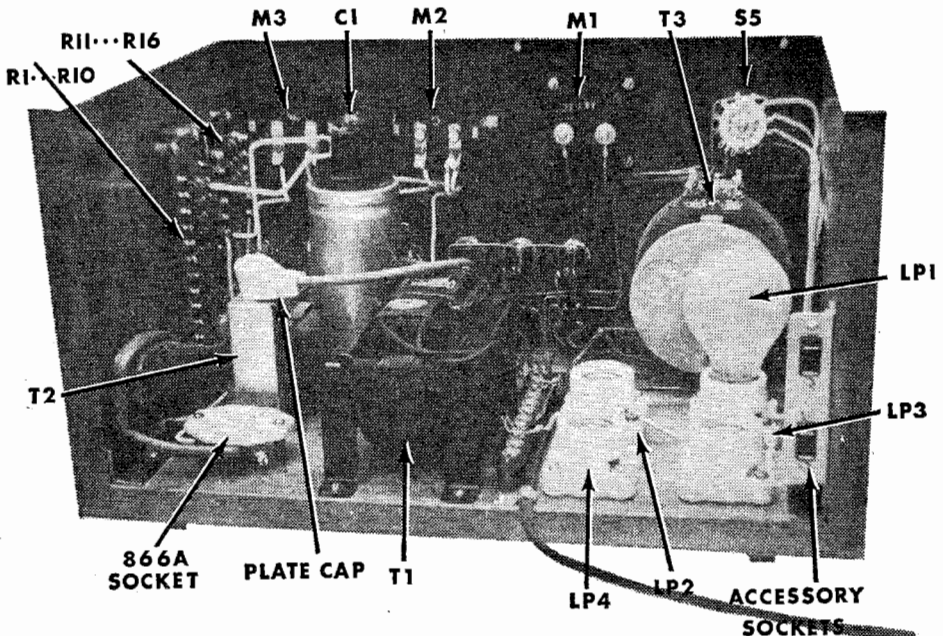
Inside cabinet, parts locations are easily identified. Mount large parts first.
